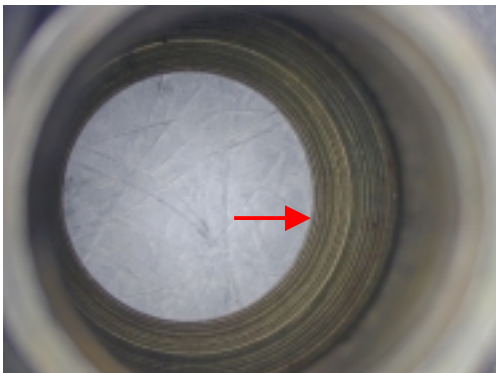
View of tube nut from bottom side. Machining grooves present on angled mating surface (at arrow).
